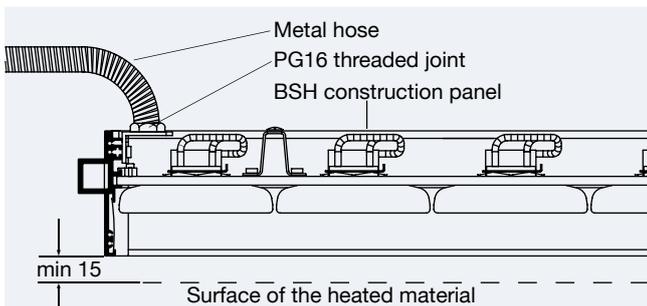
Arrangement of the connection unit for establishing the mains connection
